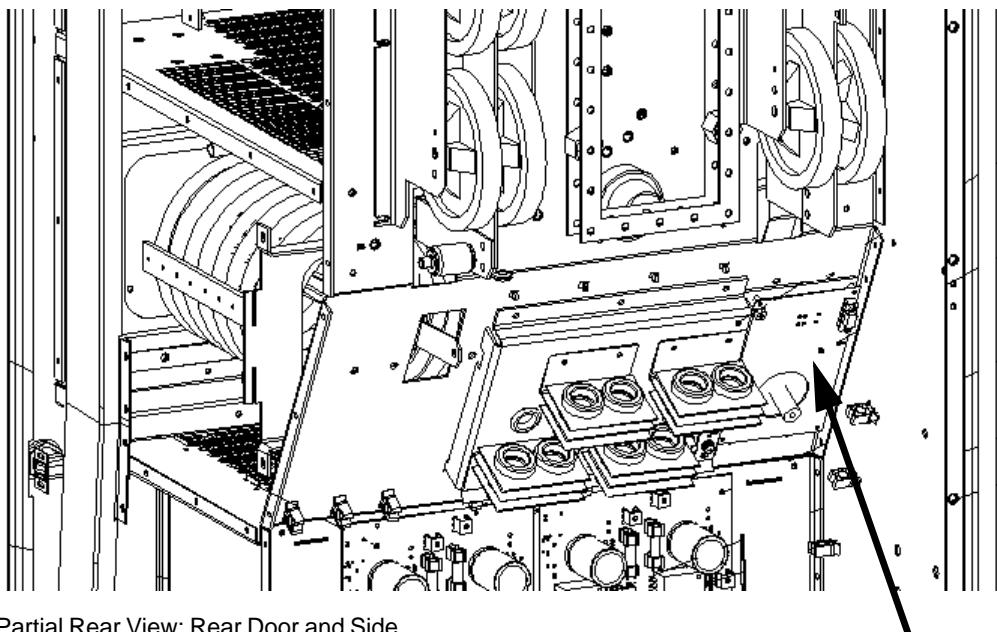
Fan Tray Assembly Cooling Fans (B1 and B2)
